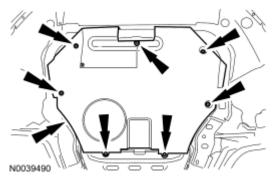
Locating Splash Shield Bolts Courtesy of FORD MOTOR CO.
